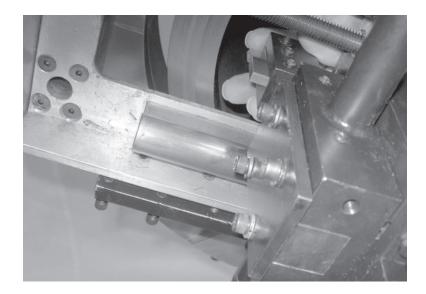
From the inside, slide the counterbore holder into the tool block with the cutting edge of the tool facing the I.D. of the pipe.
